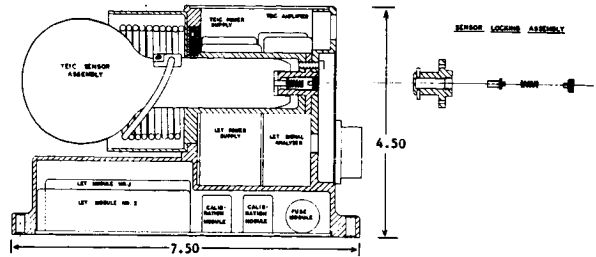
Active Dosimeter Module Mounting Sensor Locking Assembly Side Views
